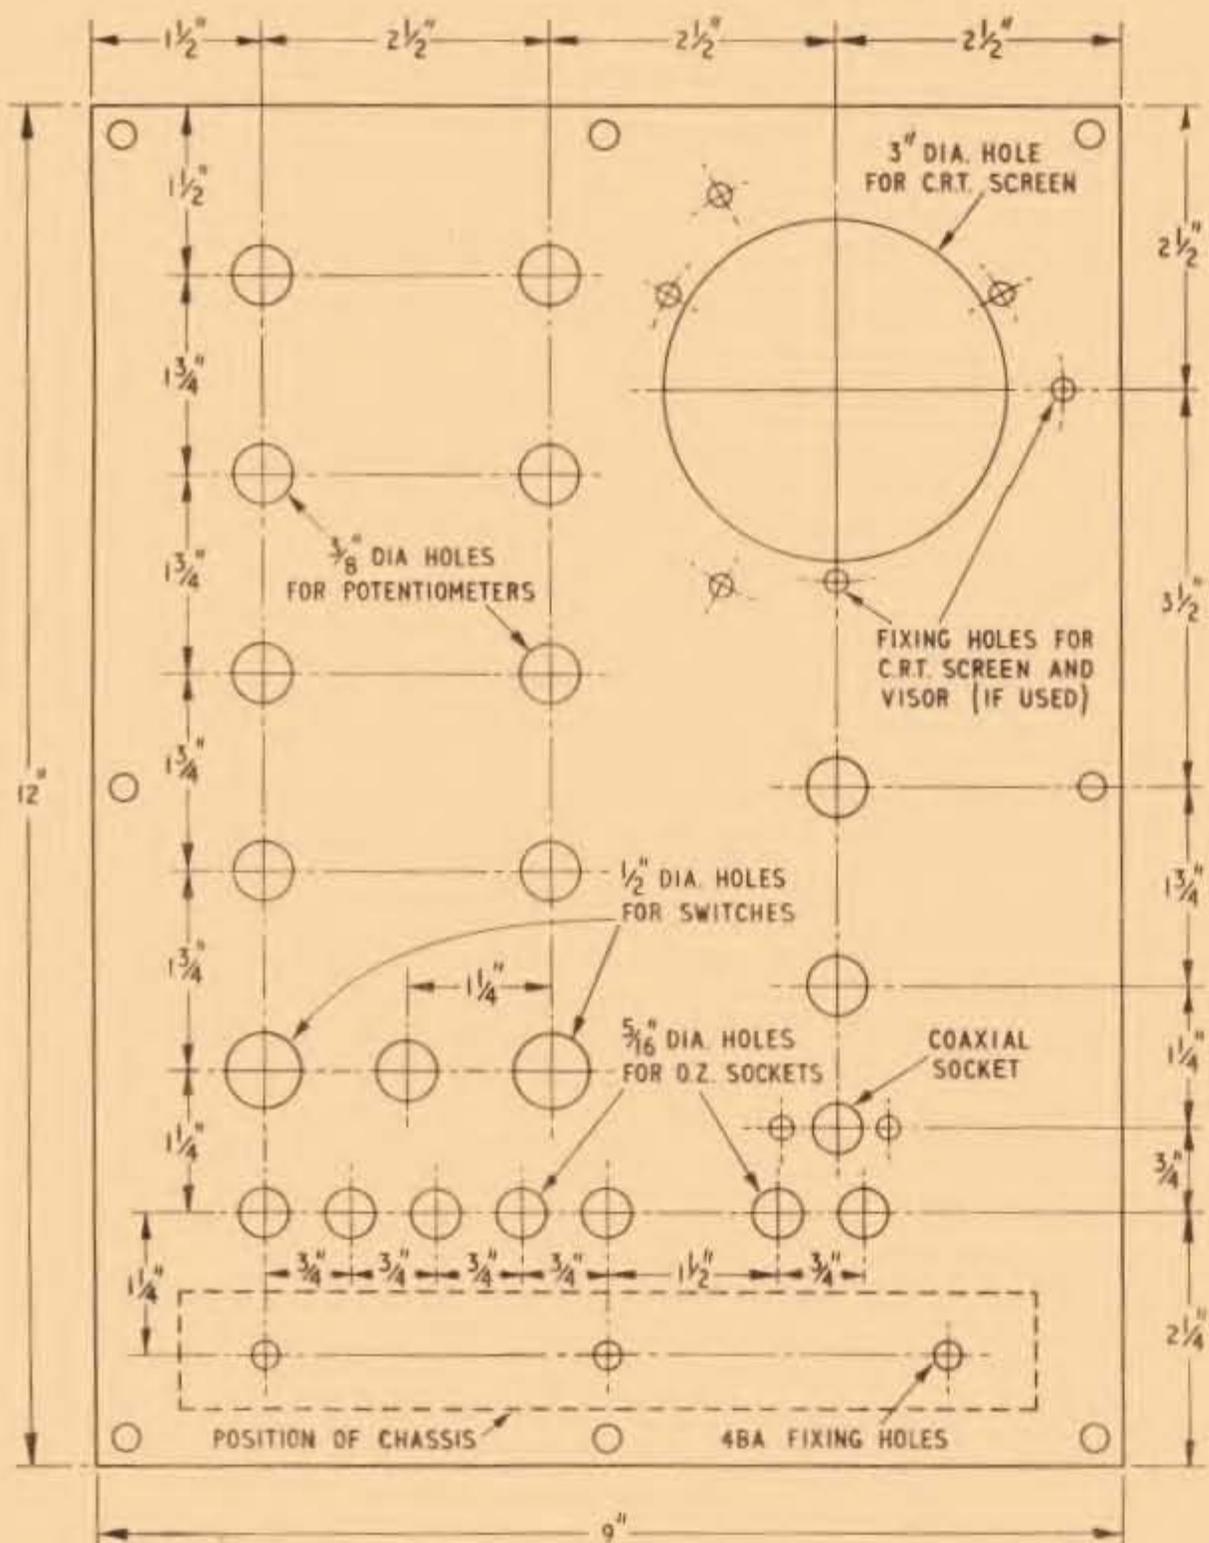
(left). The front panel drilling details. This panel consists of a piece of aluminium sheet $\frac{1}{8}$ inch thick
